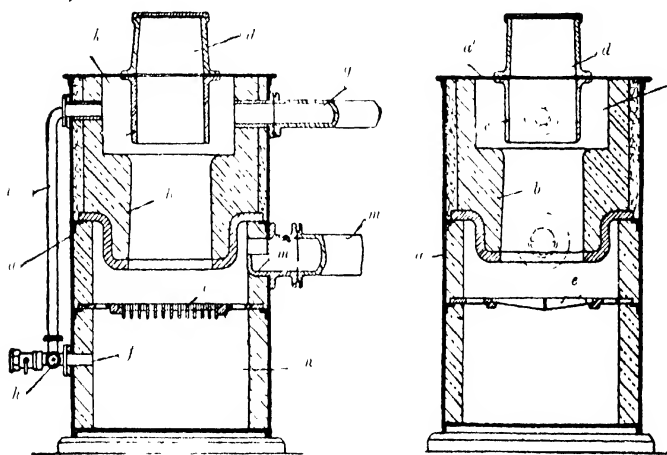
Scheben & Kruedwig briquette suction-gas producer.
